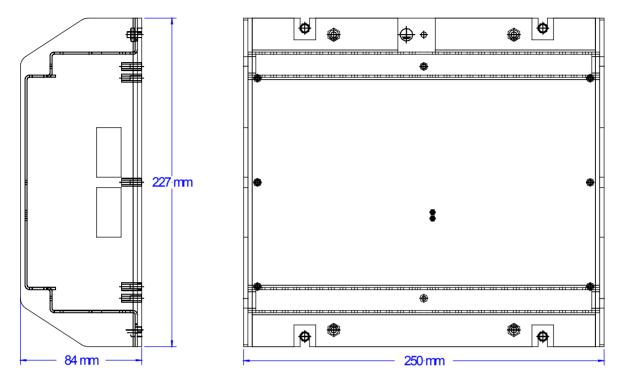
Sheet metal housing easYgen-3000 - dimensions
